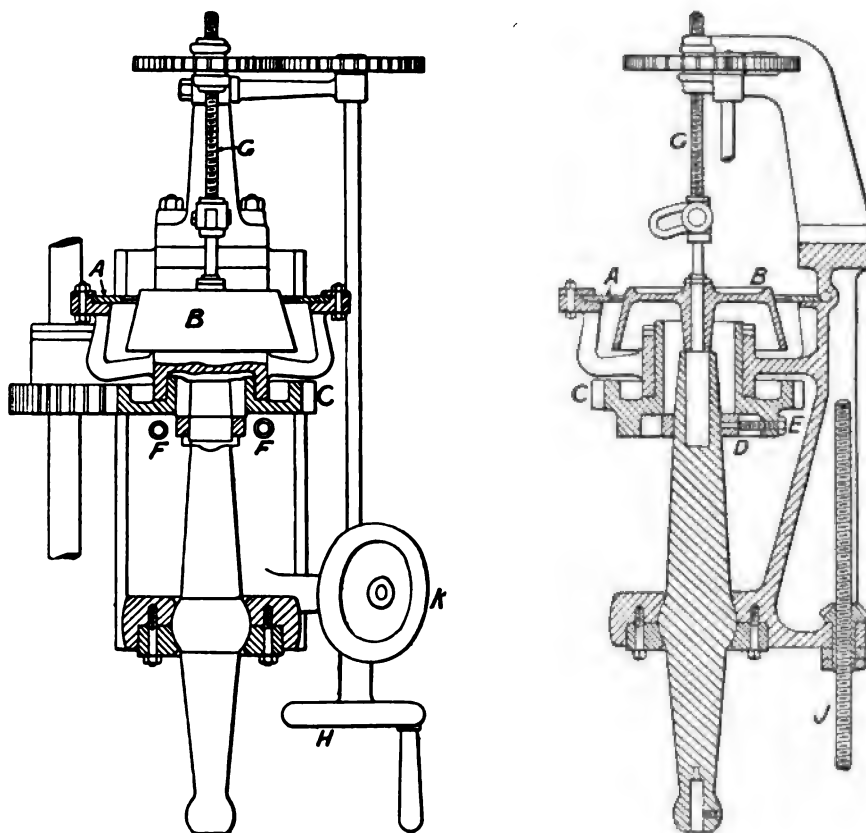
Mechanism of Angular-Hole Drilling Machine.
